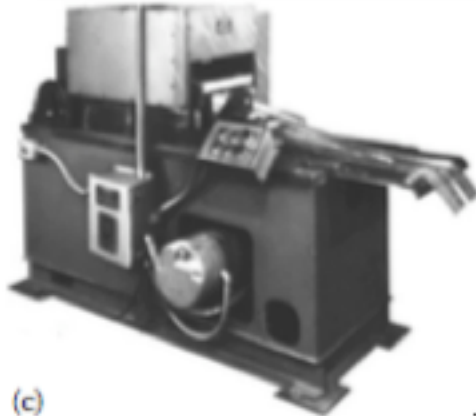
Book mold grid caster. (From Wirtz Manufacturing. Available at <http://www.wirtzusa.com>.)
